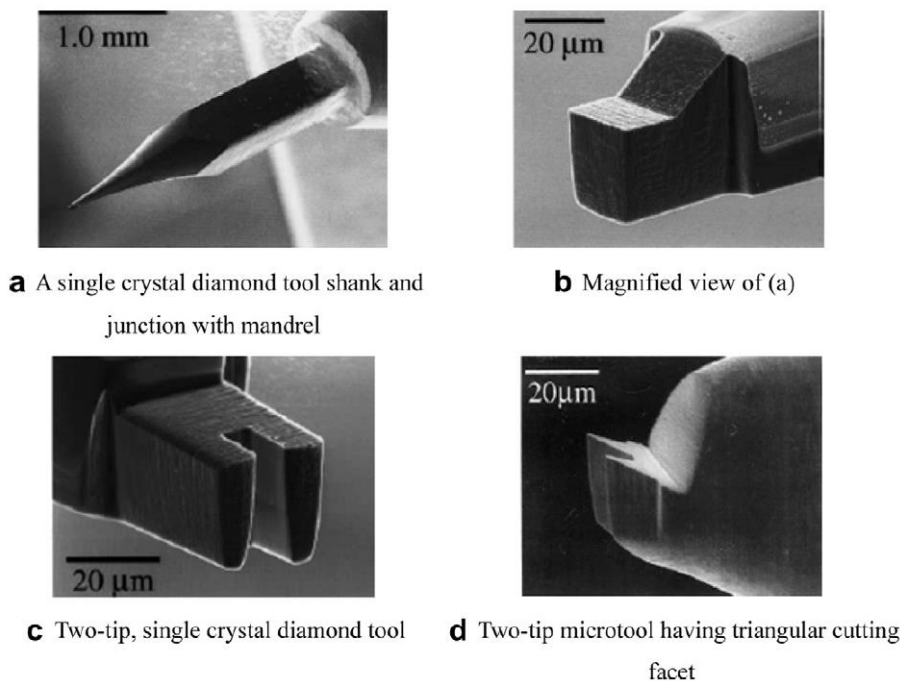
Mechanical cutting tools fabricated by FIB milling process
